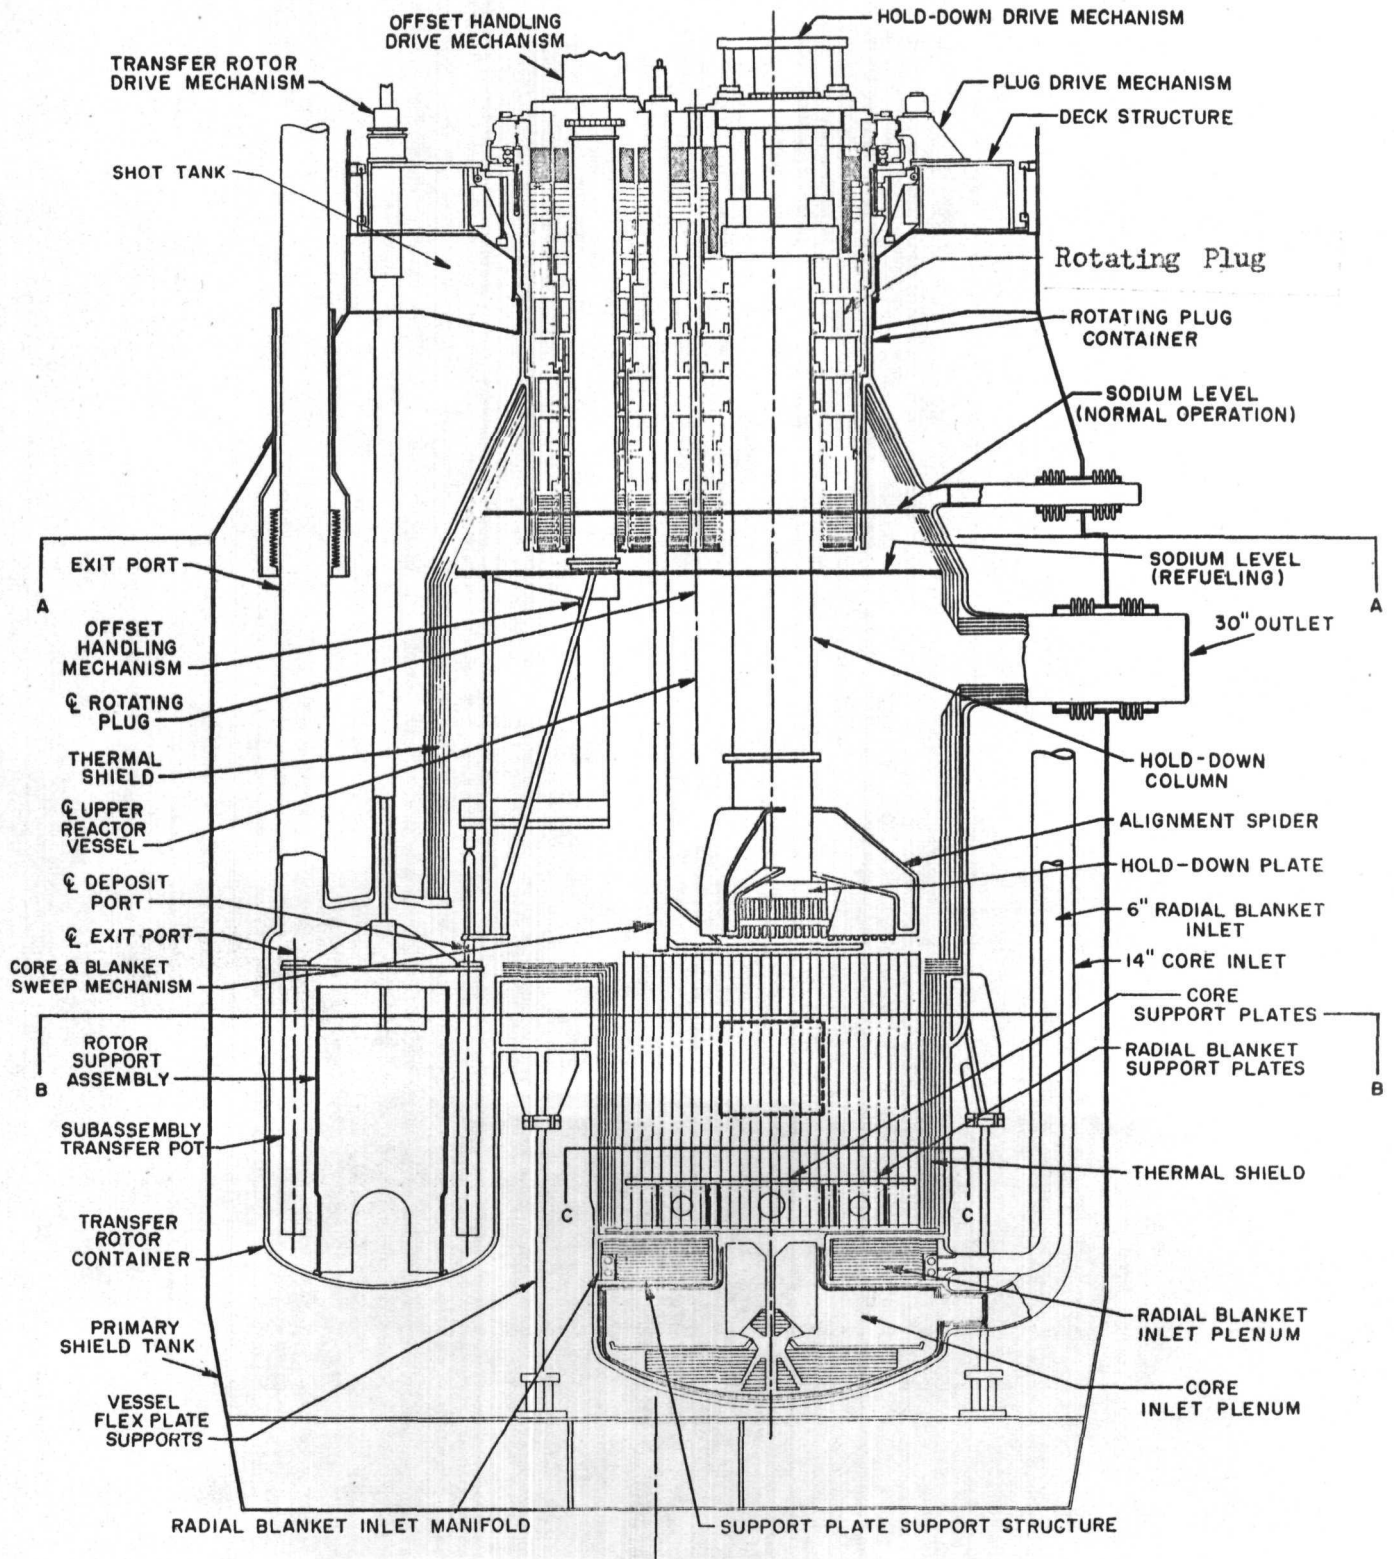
Cross Section of Reactor Showing Shield Plug in Place
